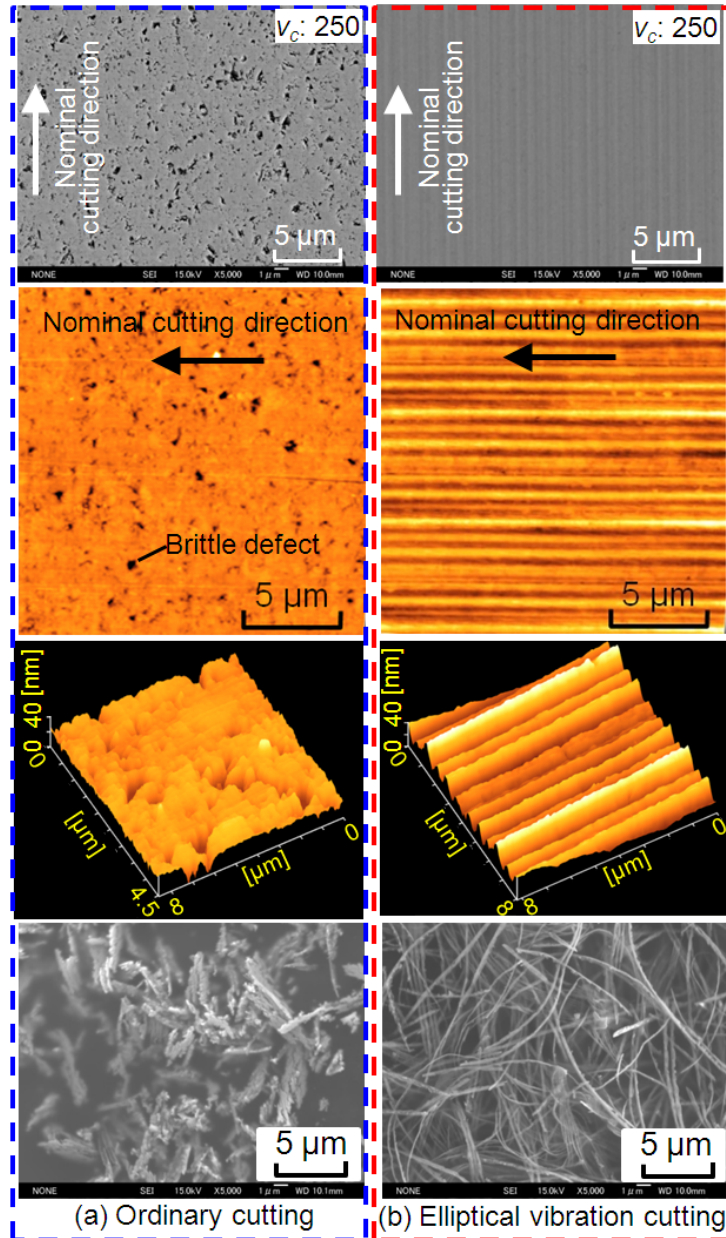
Photographs of machined surface and chips formed in ordinary and elliptical vibration cutting ( $v_c$ : nominal cutting speed mm/min, nominal cutting distance: 4.3 m)
